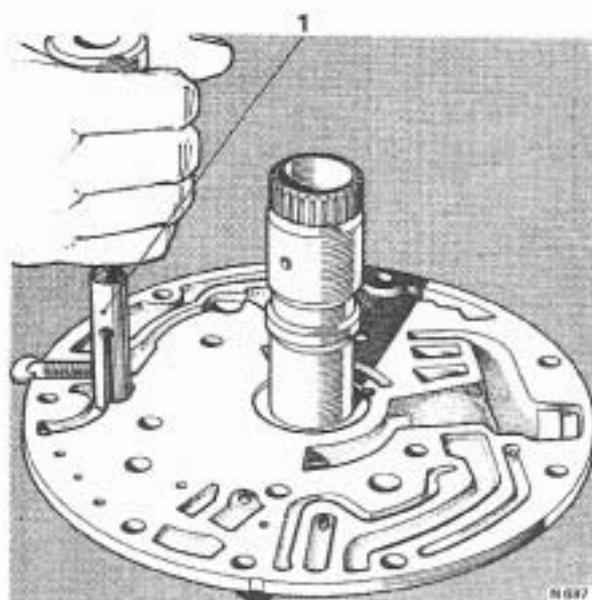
REMOVING THE BY-PASS VALVE SEAT
